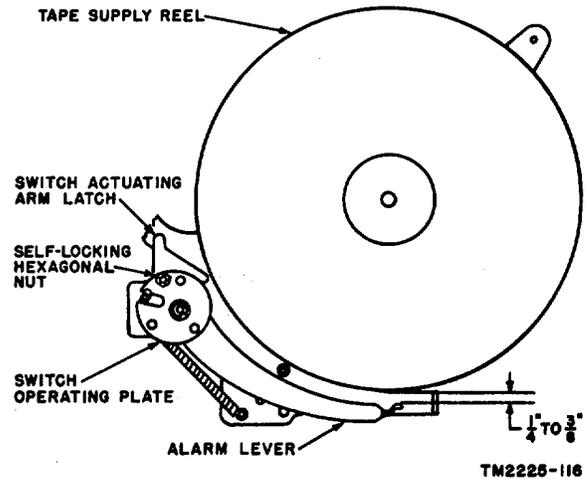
Switch actuating arm latch (TT-76A/GGC and later models).
